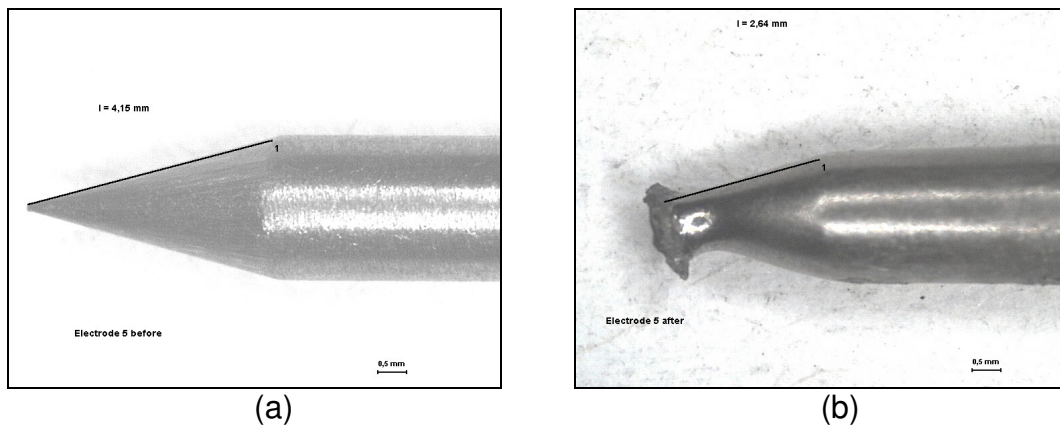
Electrode 5 used for experiment number 2: (a) before welding; (b) after welding.
